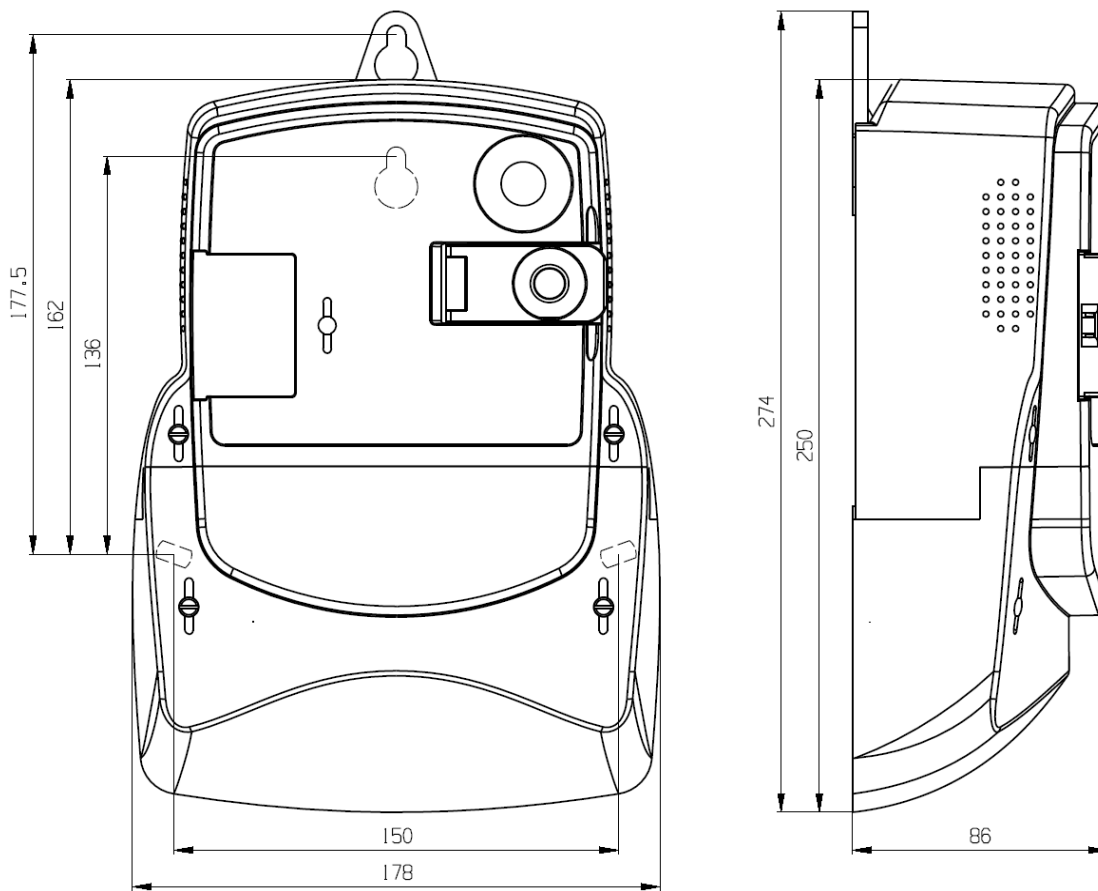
Overall and fixing dimensions of an MT382 meter fitted with a regular terminal cover
